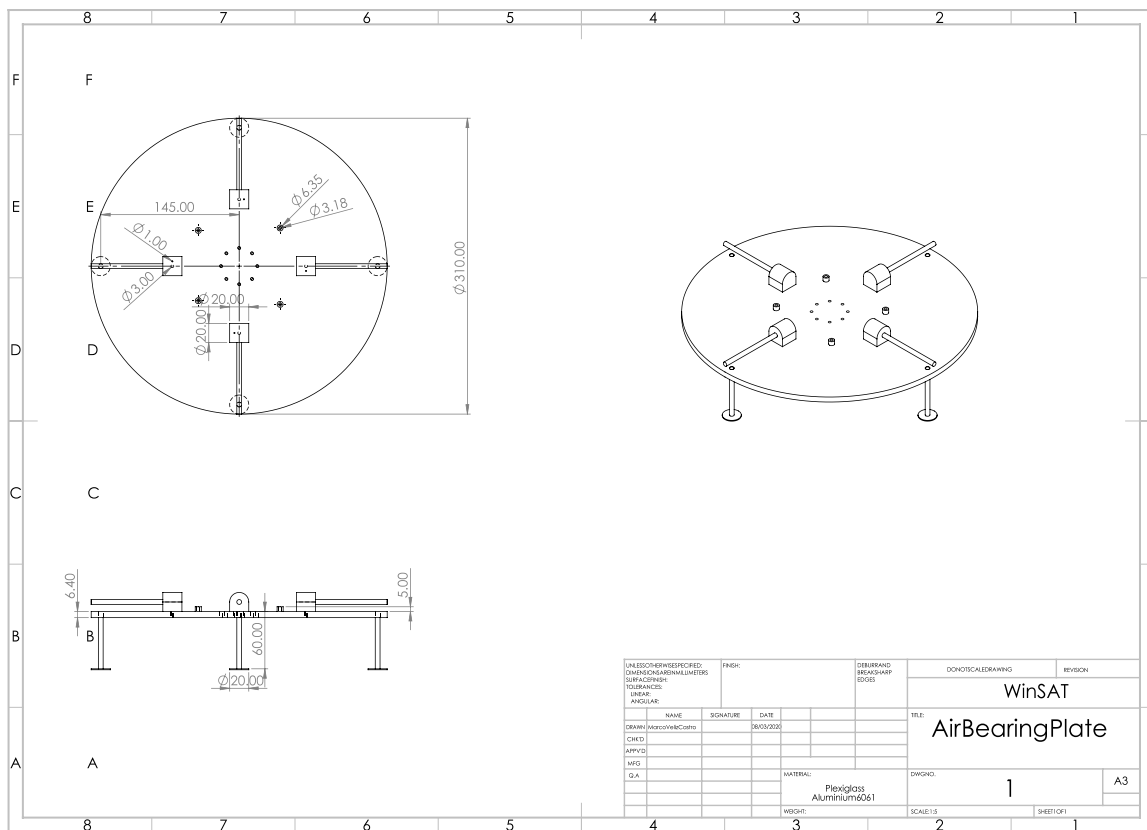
SABB Mounting Plate with 3-Axis Balancing System Schematic
